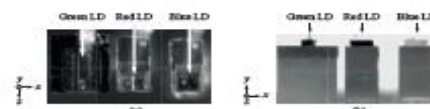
(a) Top and (b) front view of the laser diode subassemblies.
